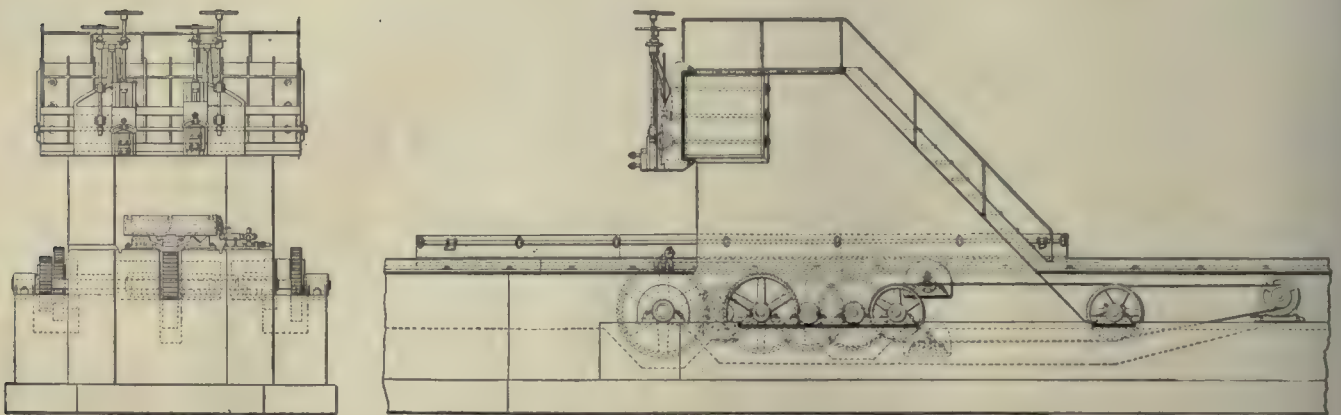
SIDE AND END ELEVATION OF PLANING MACHINE
